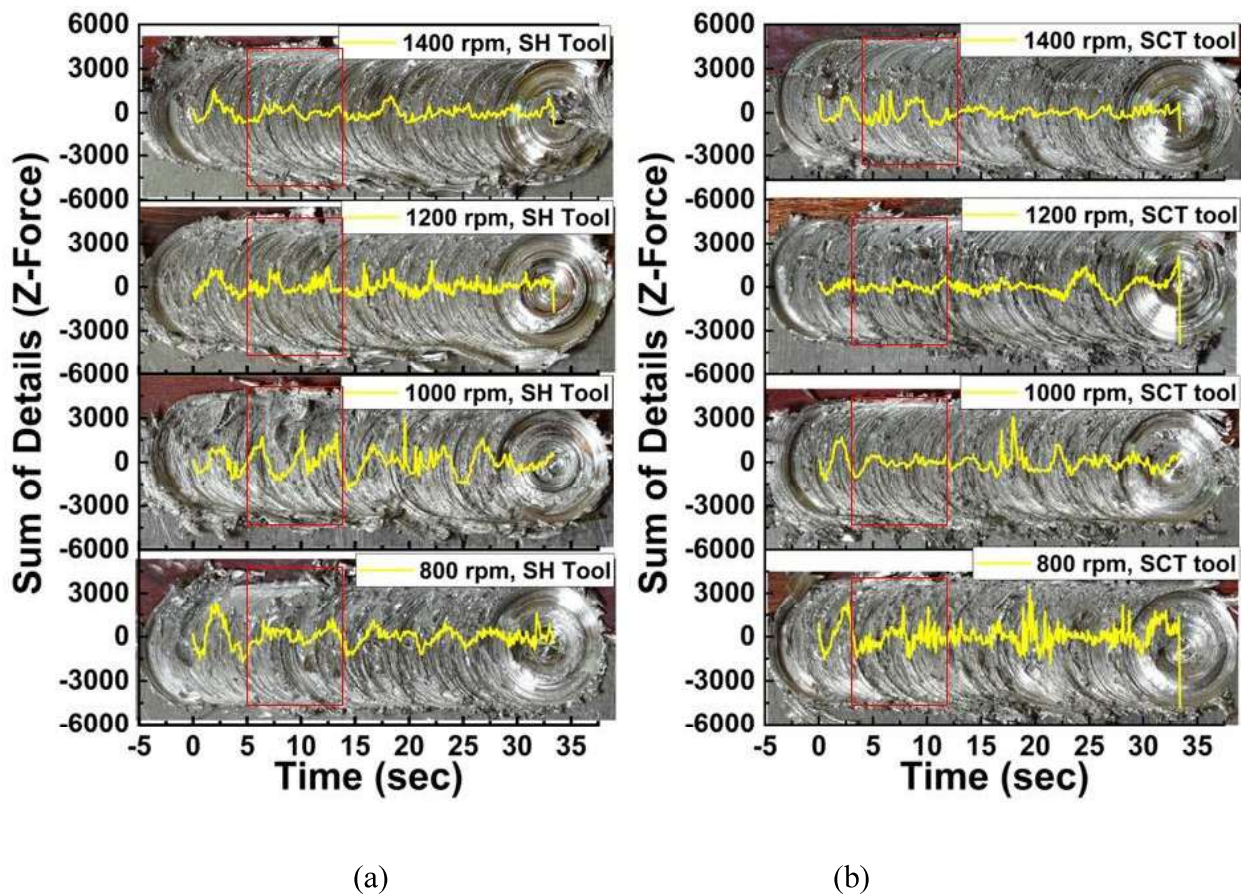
Variation in weld bead appearance with respect to Sum of details (Z-force) (a) SH tool, (b) SCT tool
